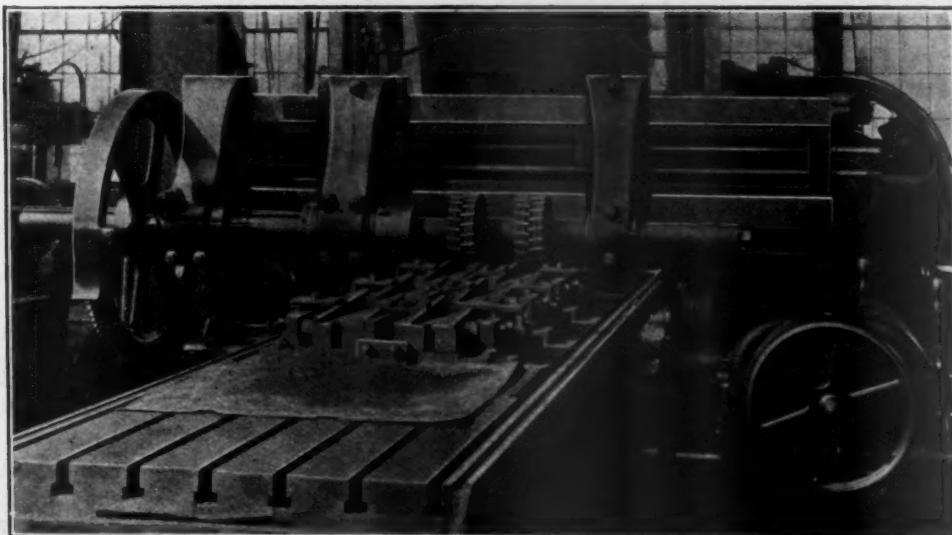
FINISHING THE INSIDE SURFACES OF SHOES AND WEDGES.
